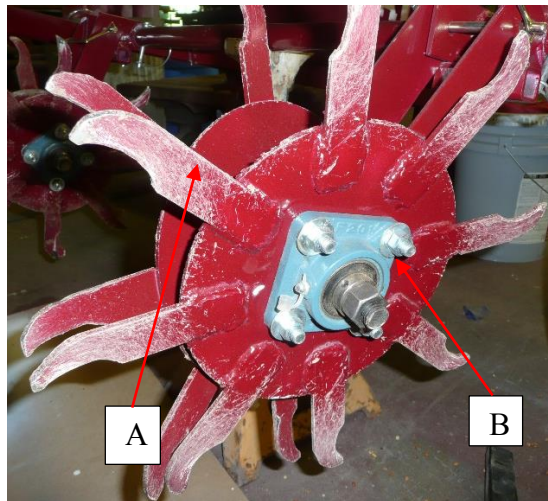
Constructed Residue Manager. A) Tine B) Flange bearing
